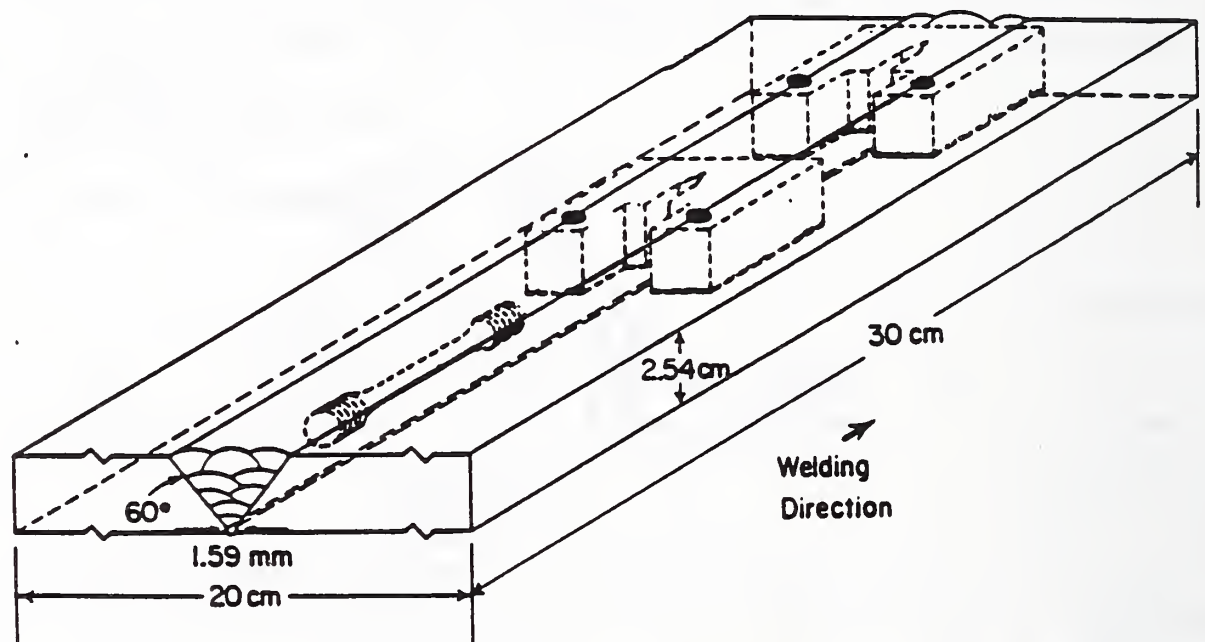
The welding configuration and specimen locations used for this study.
